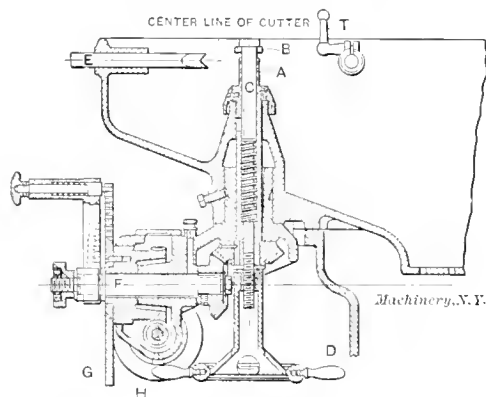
The Work Spindle and its Clamping and Indexing Mechanism.
